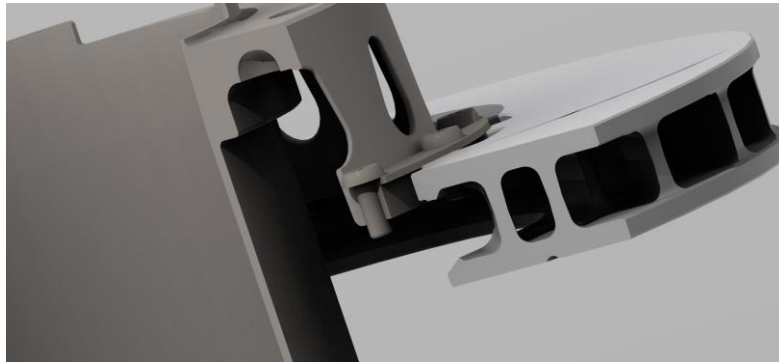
Wheel Hub and Brake Disk - Assembled (Half-view)
